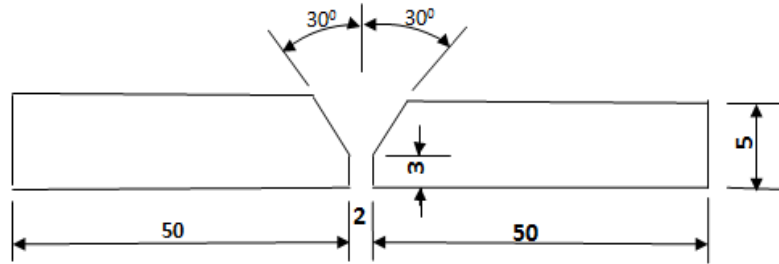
Sample preparation for butt (v-groove) welding
